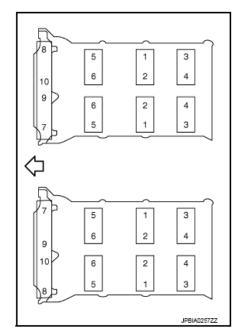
Identifying Camshaft Sensor Bracket Bolts With Tightening Sequence Courtesy of NISSAN NORTH AMERICA, INC.
